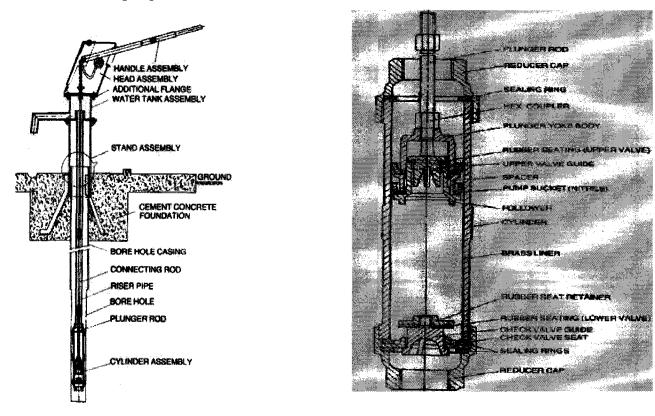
Sectional details of India Mark II deep well Handpump (left) and its Cylinder Assembly (right) (Source: Shree S K Industries, India).
